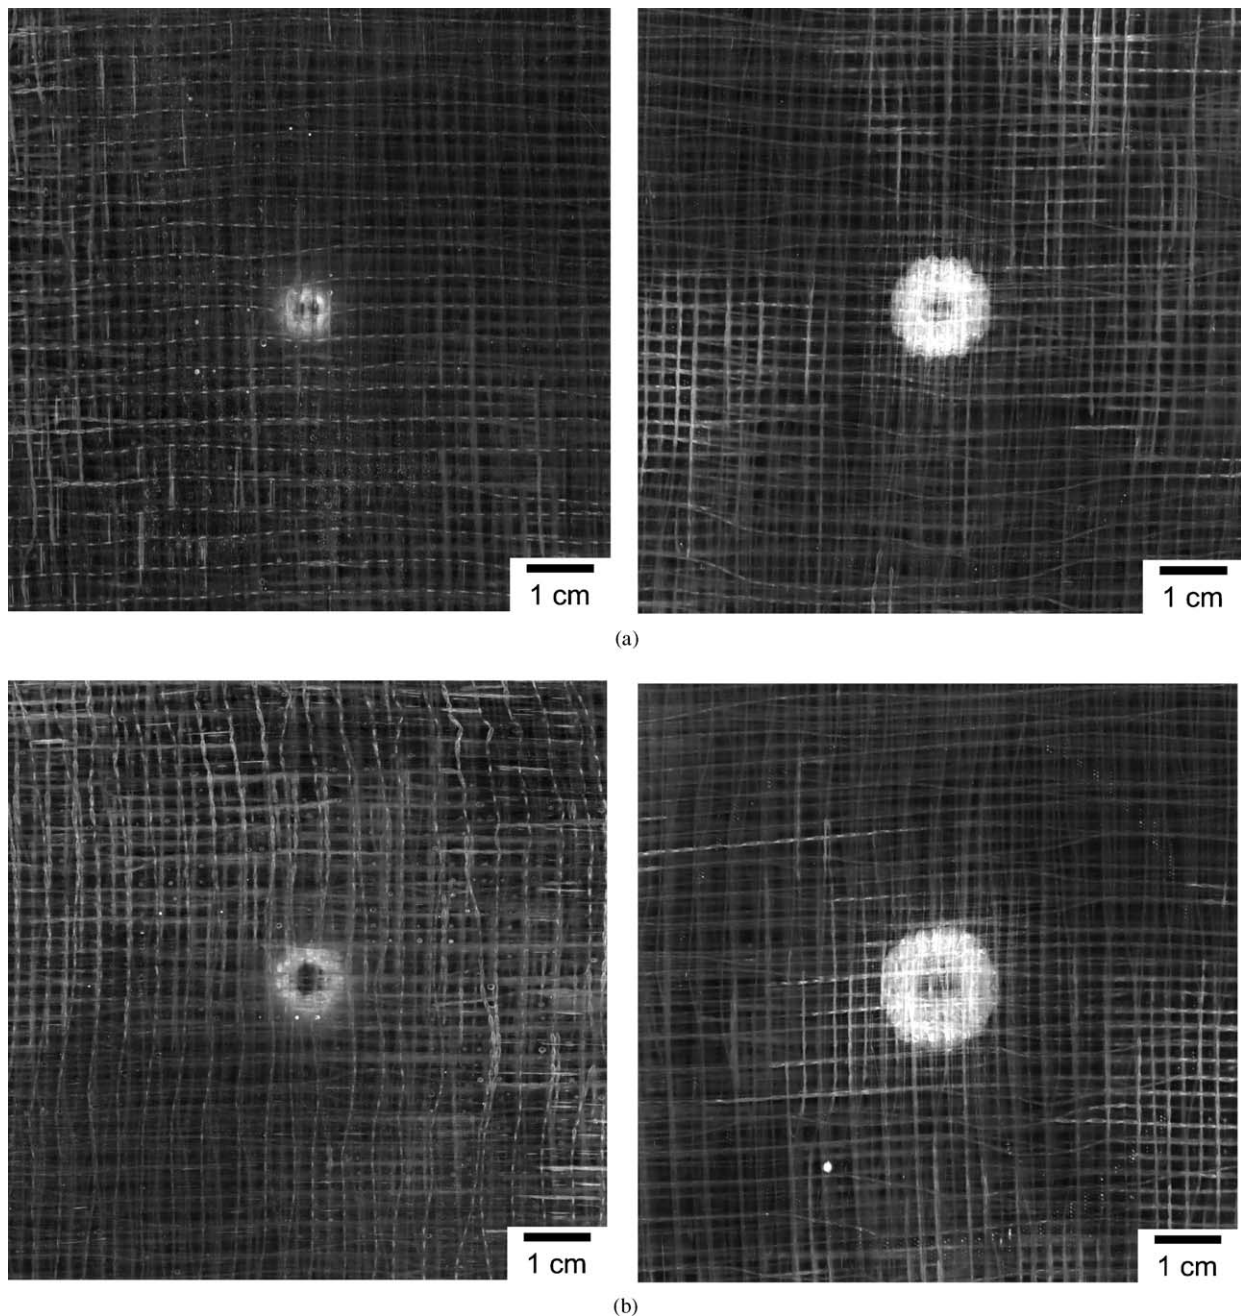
Images of the contact and back surfaces of specimens for Fig. 1: (a) small indenter, (b) medium indenter, (c) large indenter, and (d) flat indenter. Left image is the contact surface; right image is the back surface. (Continued)
